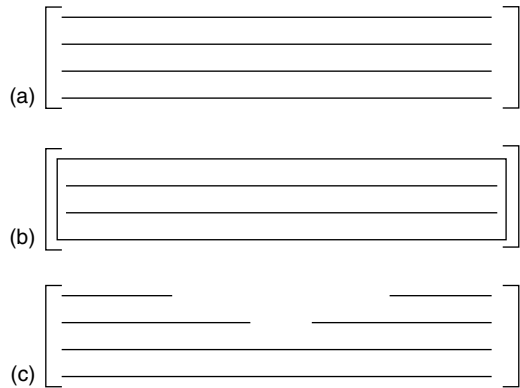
Construction of conveyor belts: (a) straight laid, (b) folded jacket, and (c) graded ply.
